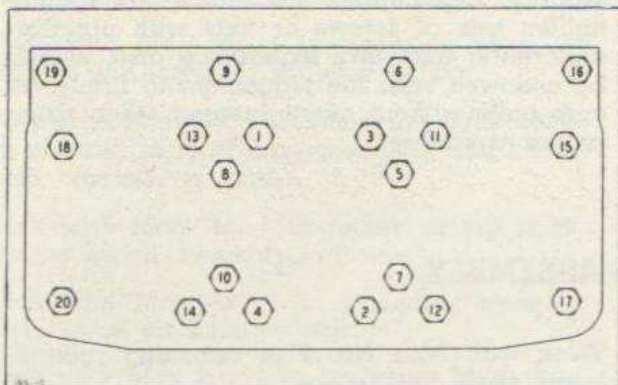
Diagram Showing Sequence for Tightening Cylinder Head Nuts
